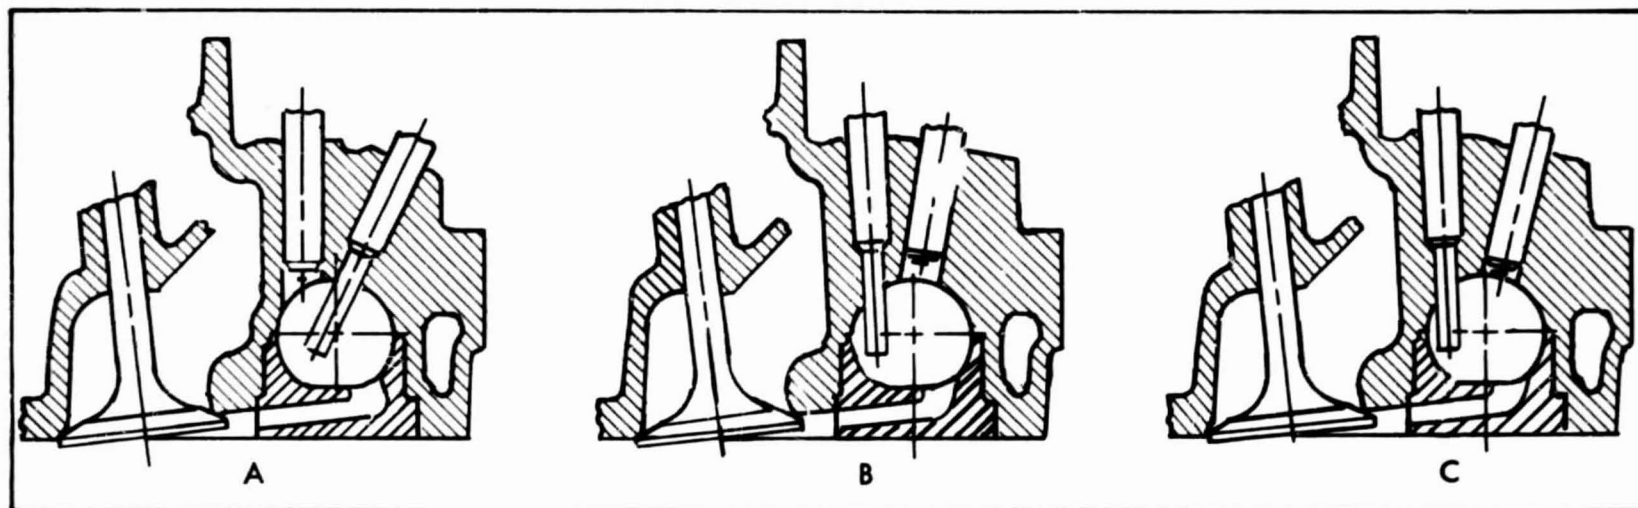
Chamber Configurations Considered for Final Design of Oldsmobile Diesel Engine (Ref. 28)
